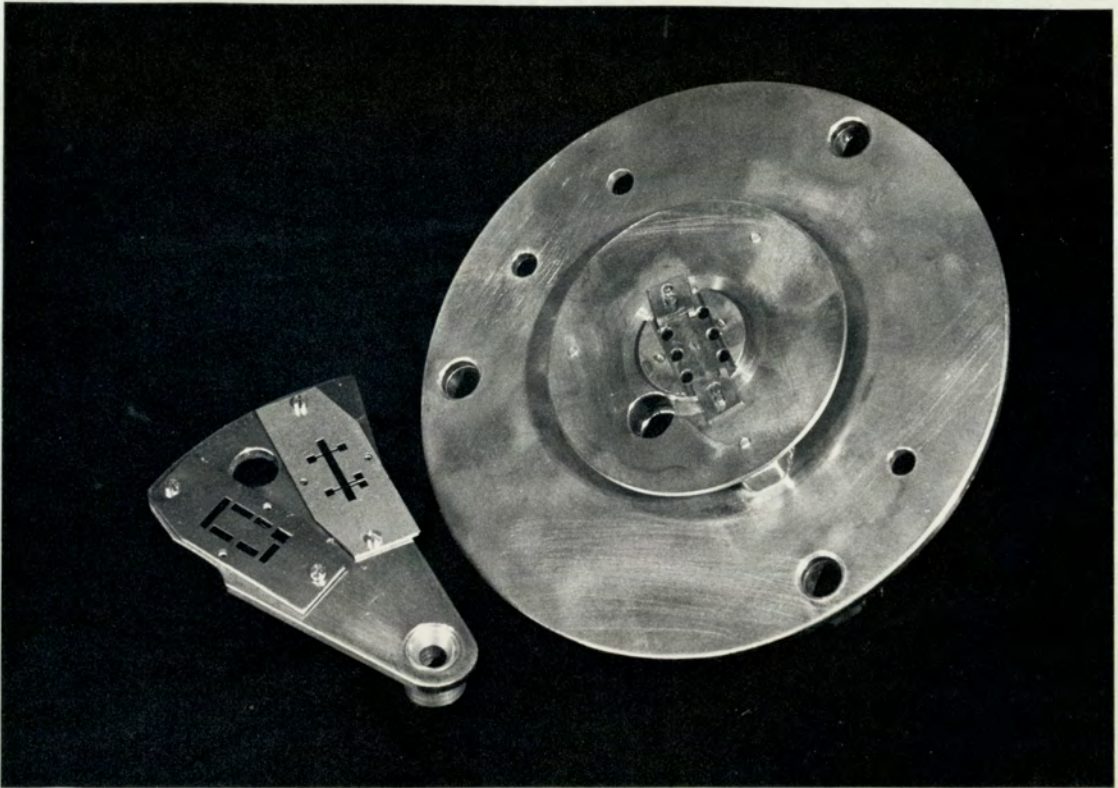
Substrate holder plate and mask holder showing the film and border masks.
